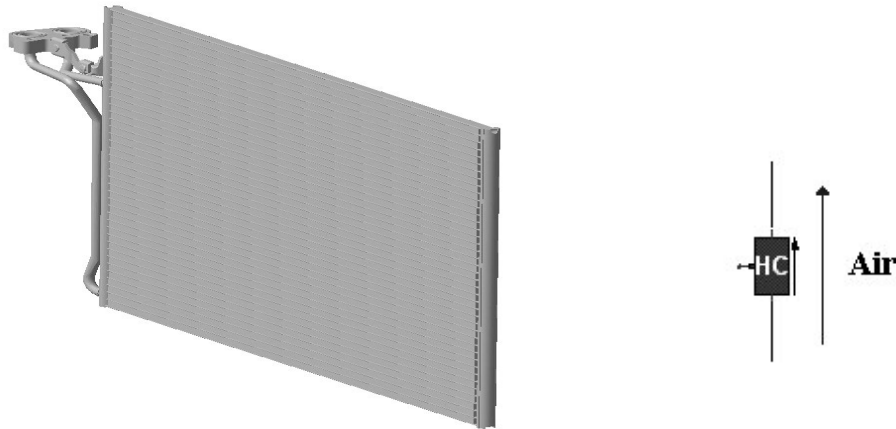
Condenser, represented in CAD and Flowmaster respectively
